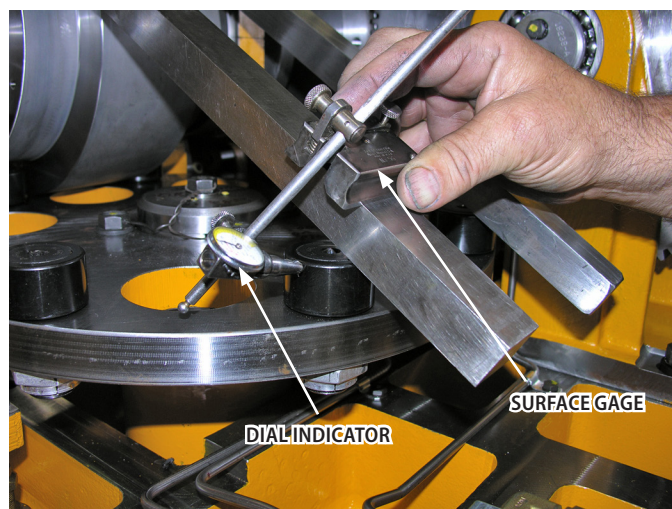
DIAL INDICATOR WITH SURFACE GAGE
